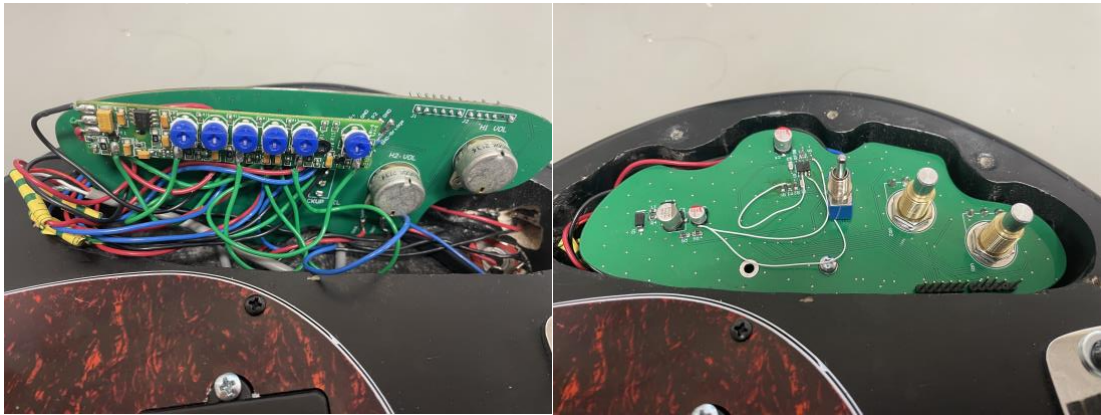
Assembled PCB. Left: Bottom Layer. Right: Top Layer.
